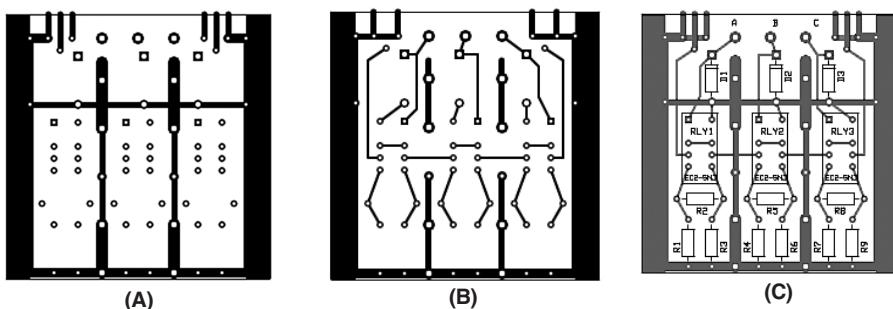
Step attenuator PC board, (A) top layer, (B) mirrored bottom layer, (C) full layout. The board is 2.185 inches wide and 2.20 inches tall.
